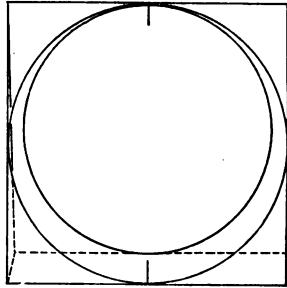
Square prism marked for cutting out the round or circular prism.
